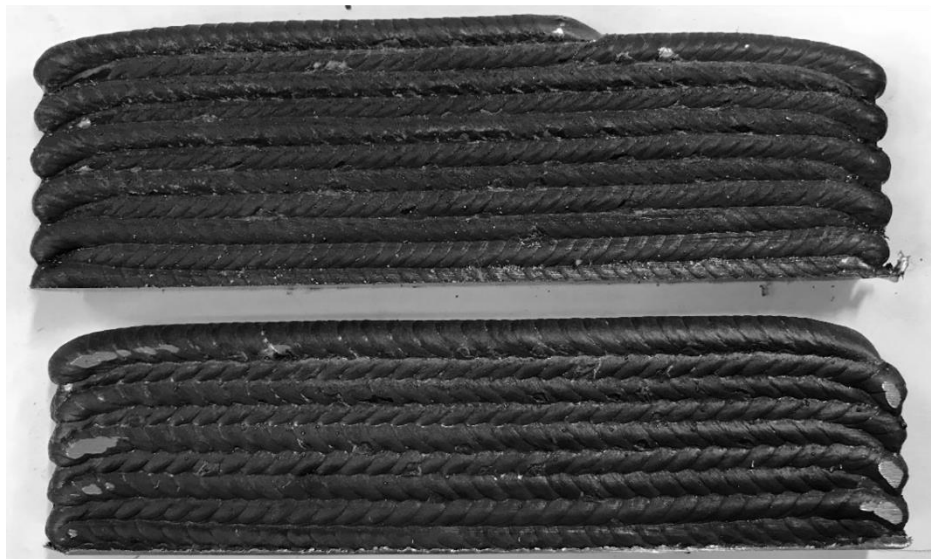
Stainless steel two wall study, zig zag 1.25-mm wall (top) and zig zag 1.75-mm wall (bottom)
